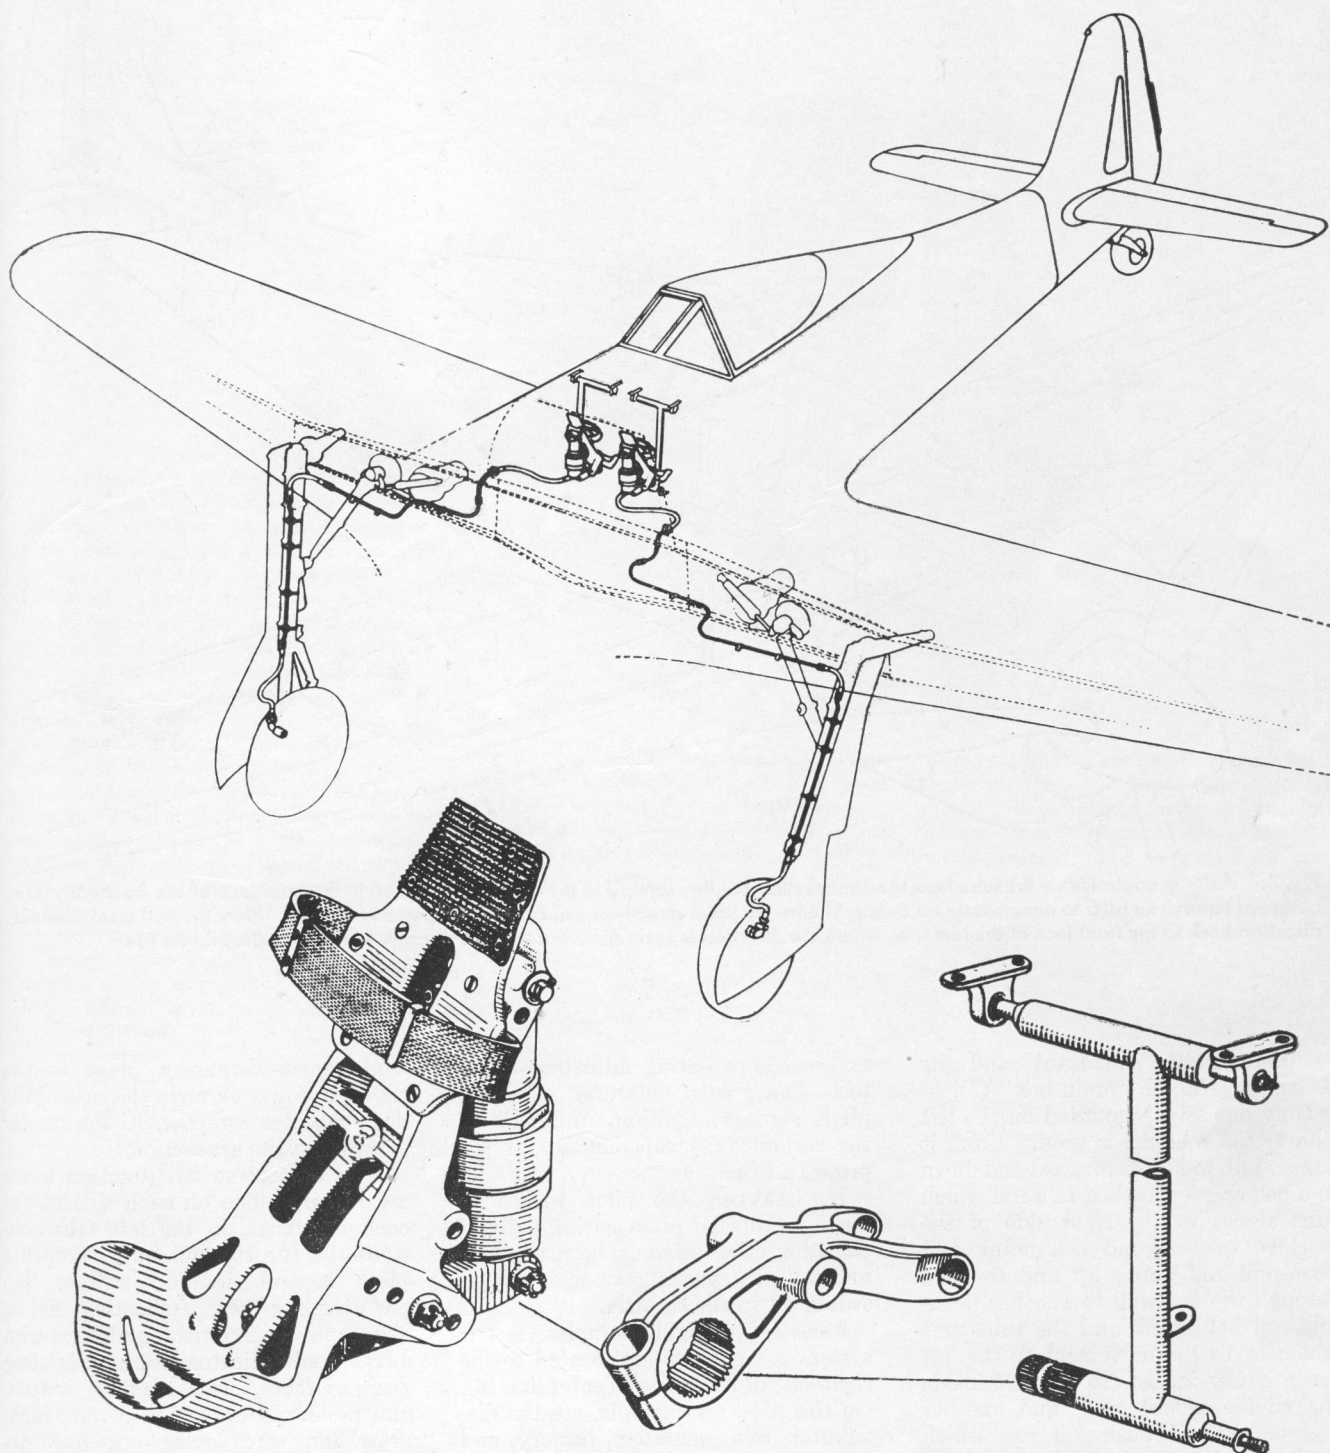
The arrangement of the hydraulic brake lines is shown in this phantom view. The hydraulic piston, which forms an integral part of the rudder pedal, is clearly shown in the detail sketch at the lower left. A pedal hanger, which is ball bearing-mounted, is shown in the center, and a pedal support bracket is at the lower right.
